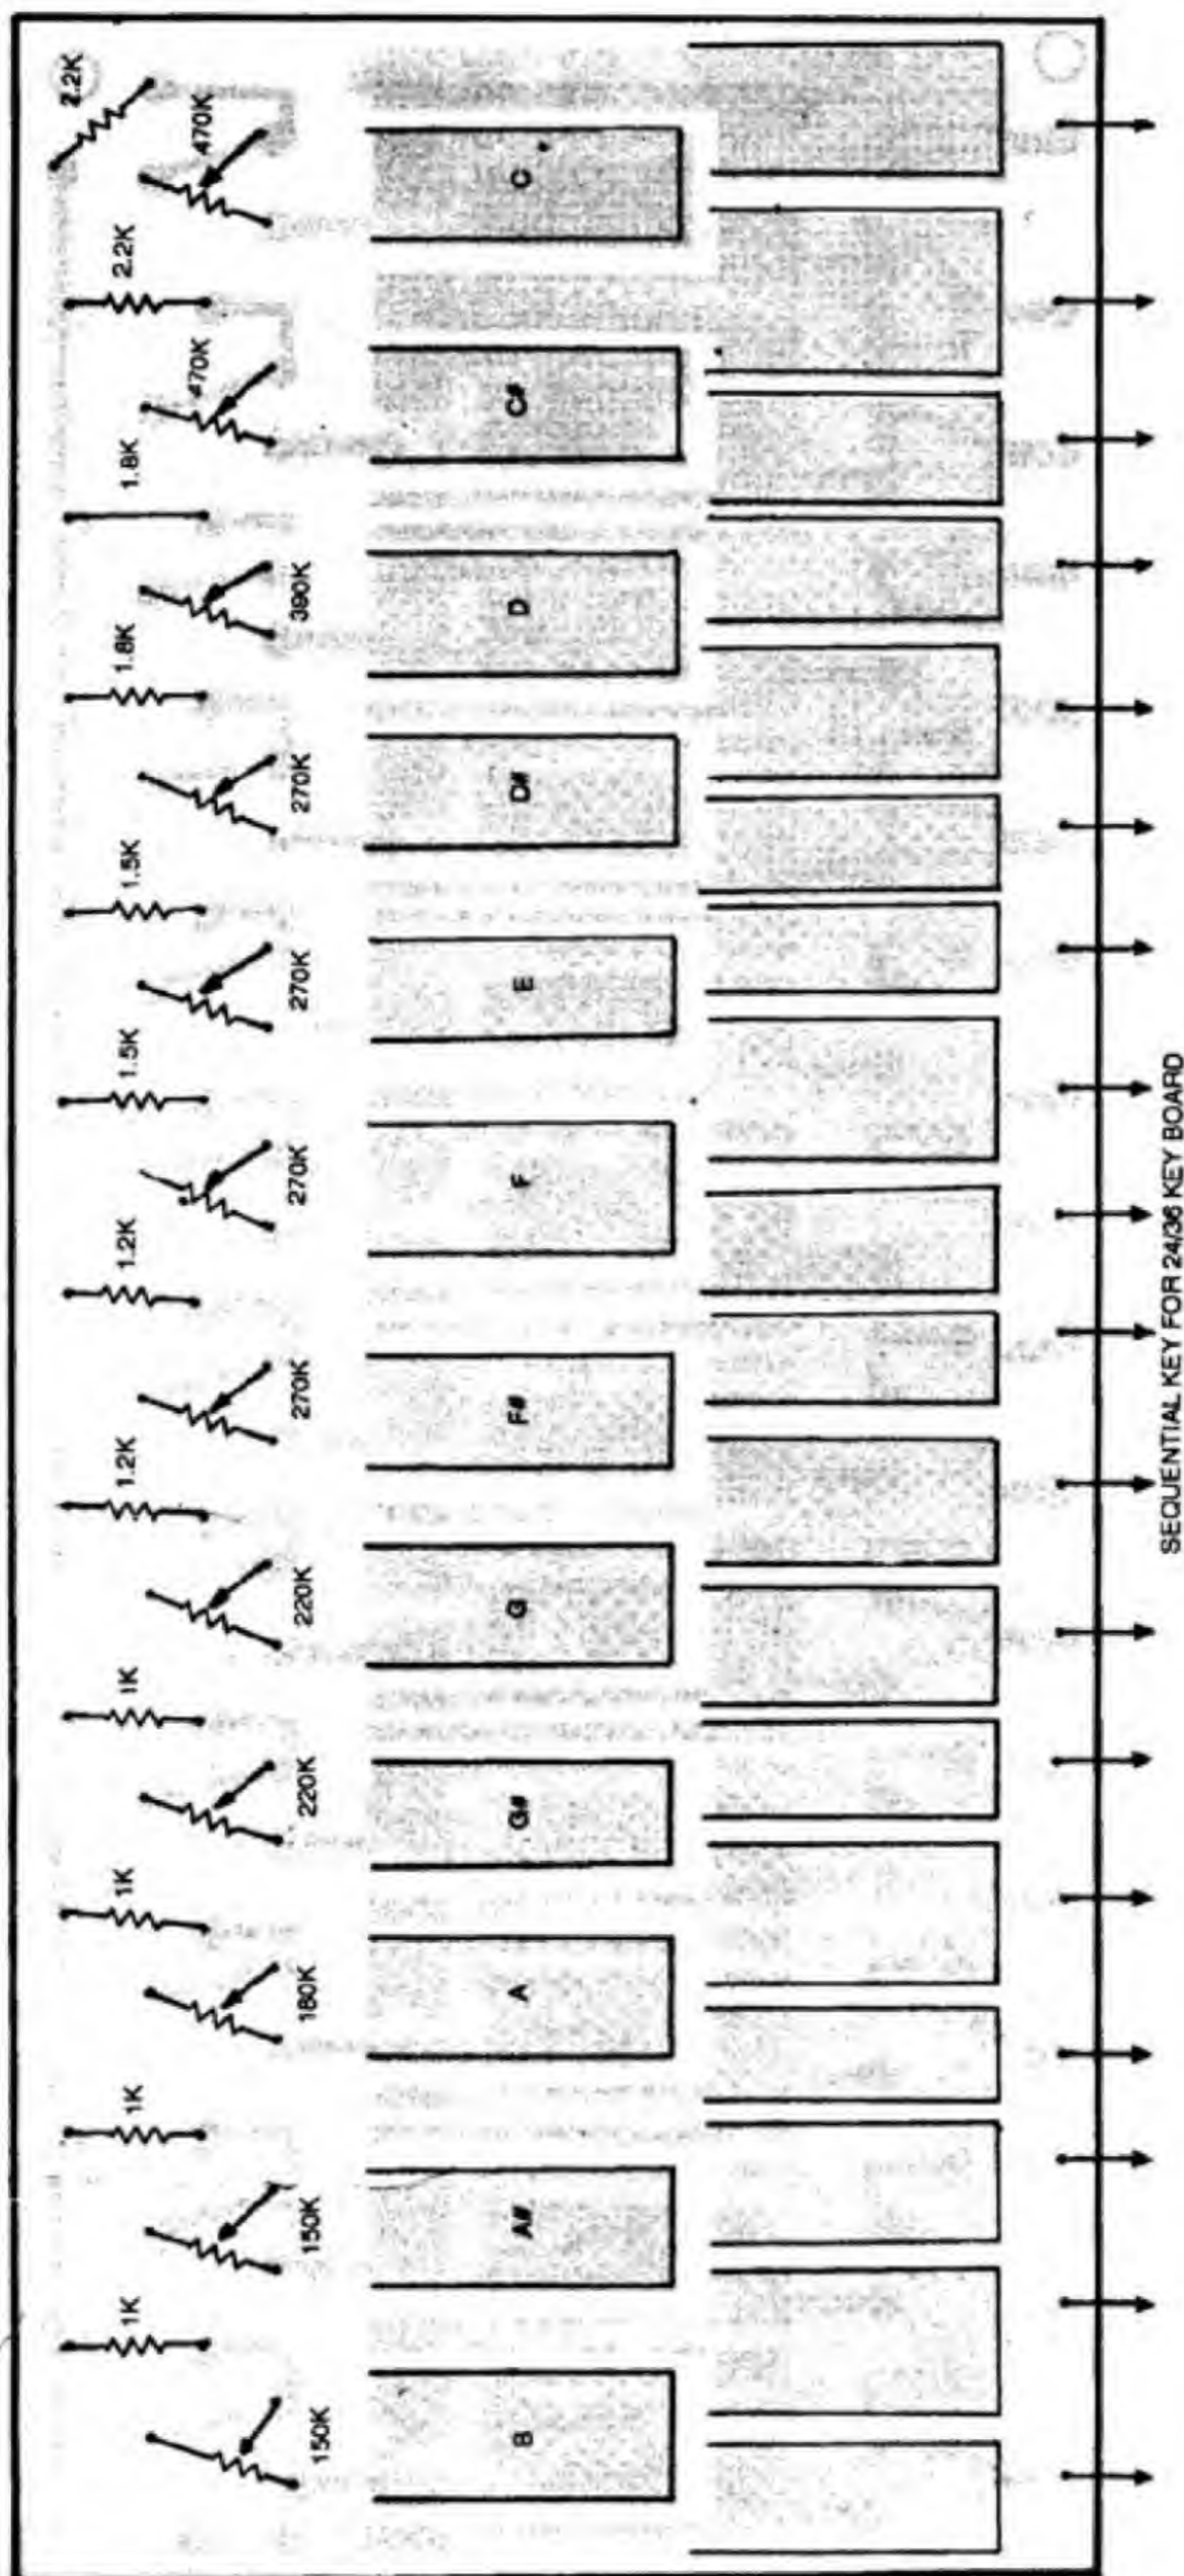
Component layout for the PCB layout shown in Fig. 5.
